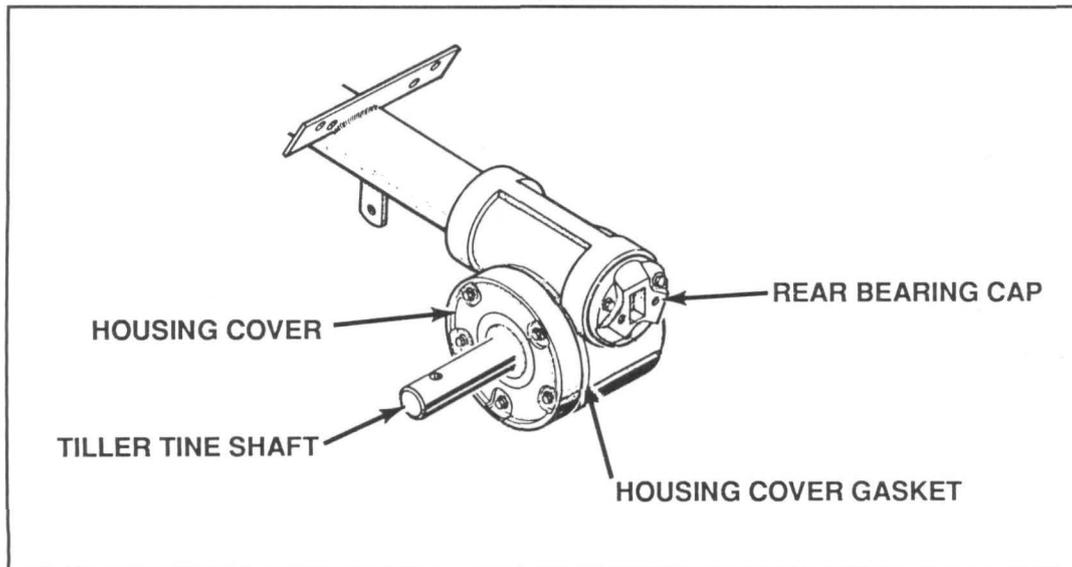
Pre-service inspection of the tiller tine shaft area.
